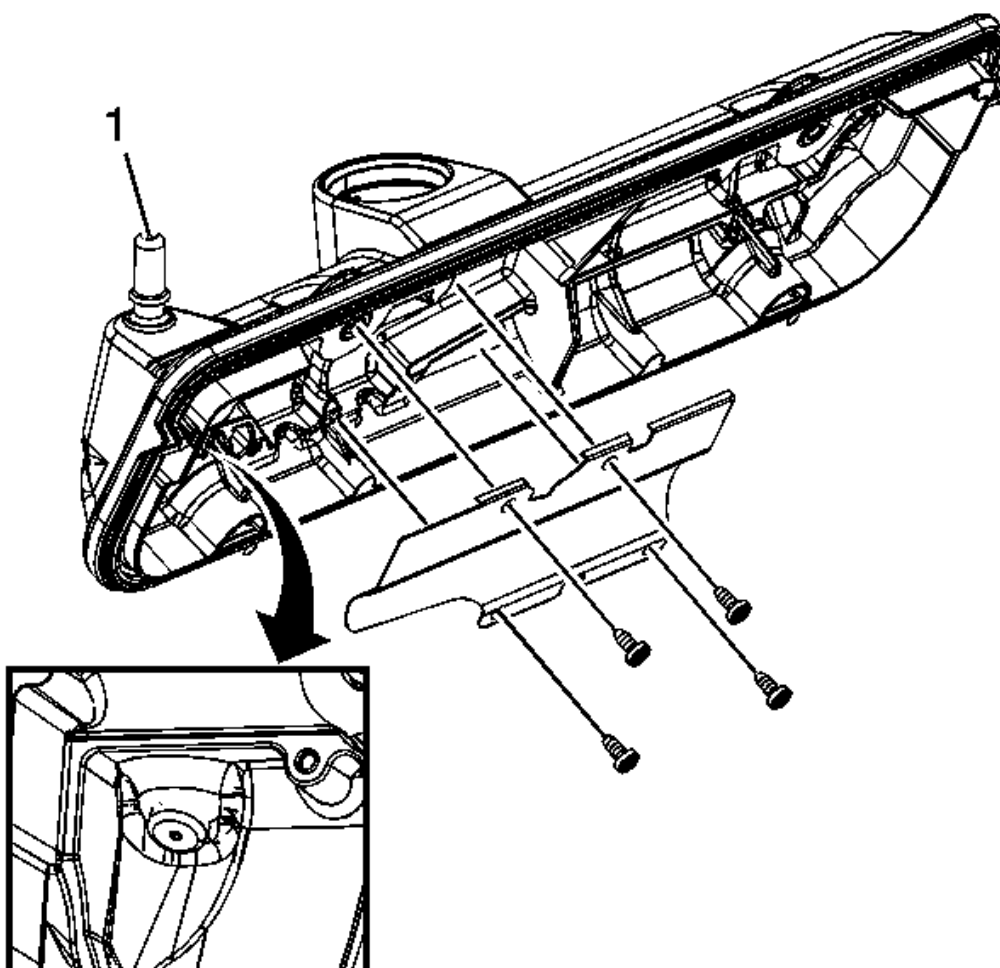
Identifying Positive Crankcase Ventilation (PCV) Valve
